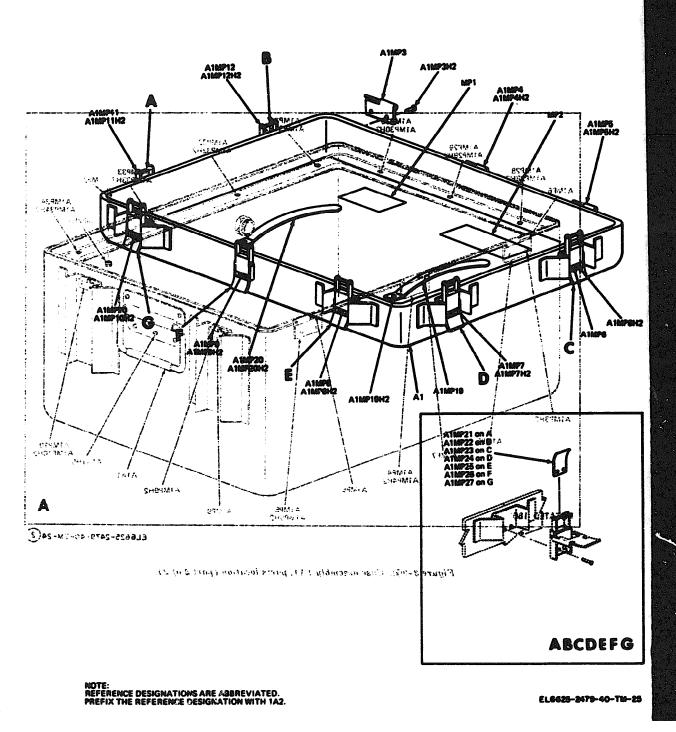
Cover, Test Set CW-1348/AYM-3, parts location.
